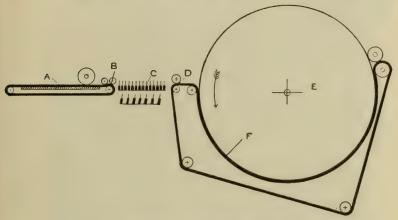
A.—SECTION OF SCREW GILL SPREADER.
